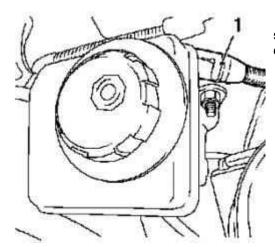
Disconnecting the supply pipeline clutch master cylinder: 1 - feeding the pipeline
